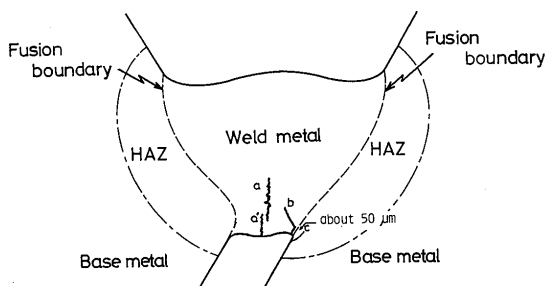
Schematic illustration of cross section of weld zone showing typical location of cold cracking
